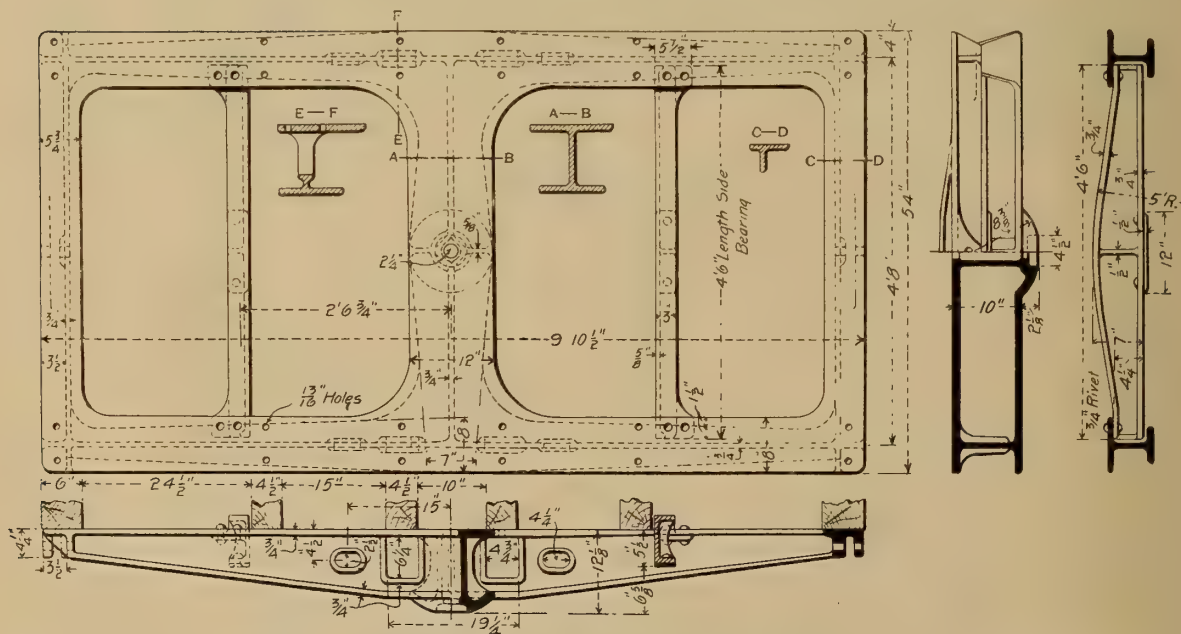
SIMPLEX BODY AND TRUCK BOLSTERS WITH SUSEMIHL ROLLER SIDE BEARINGS.
